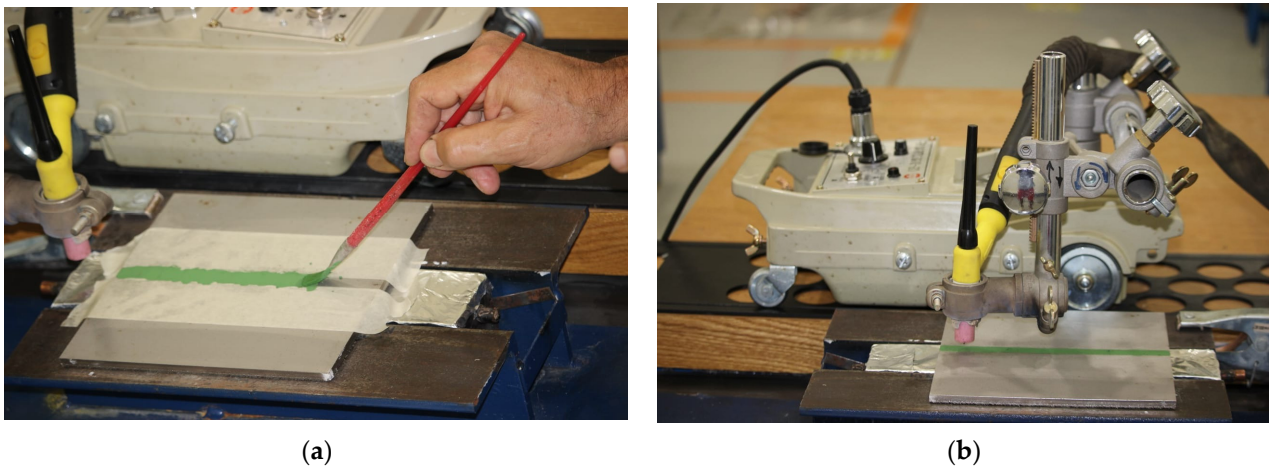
The deposition of flux on the workpiece (a), motorized carriage (b).
